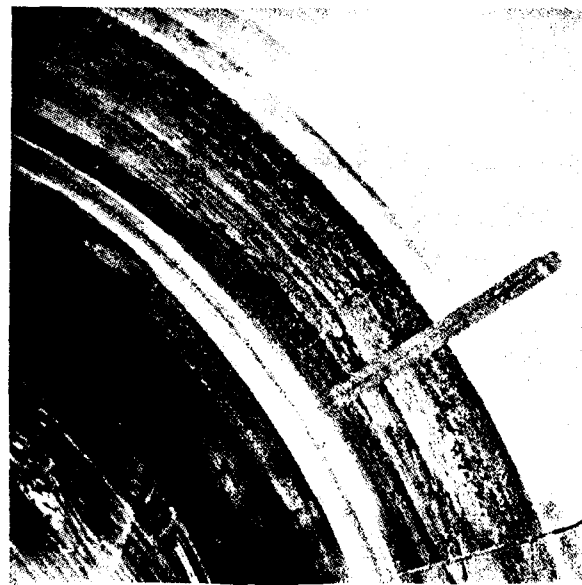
End of backup sleeve that split in service shows heat checks that were produced when the bearing housing rubbed against the sleeve. Splitting occurred when one of the heat checks extended under the shrink and working loads.
